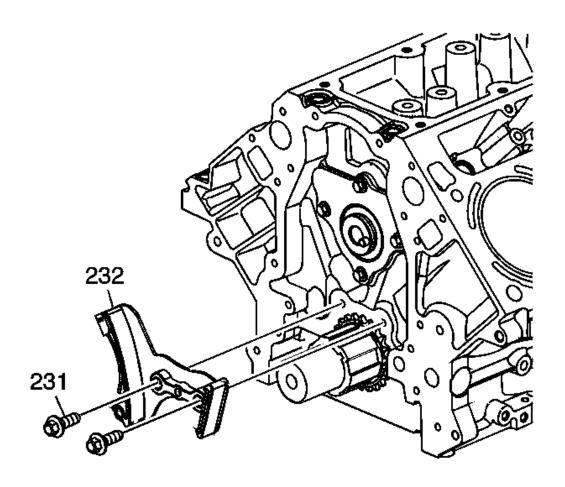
View Of Timing Chain Tensioner & Bolts Courtesy of GENERAL MOTORS CORP.
